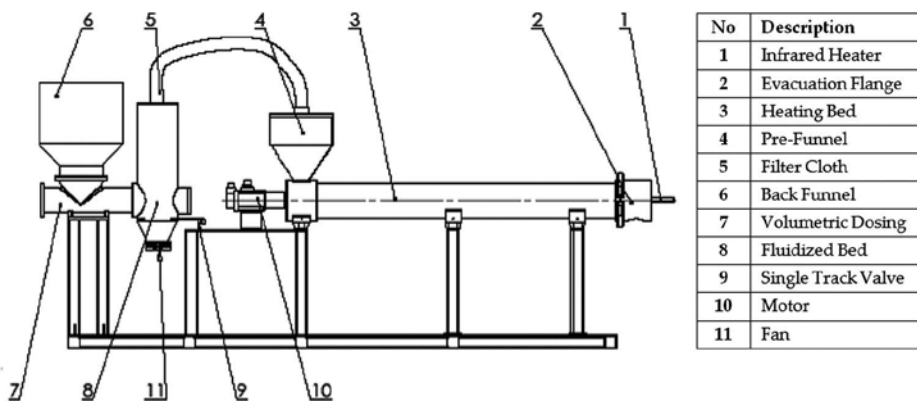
Schematic illustration of fluidized bed drying machine [26].
